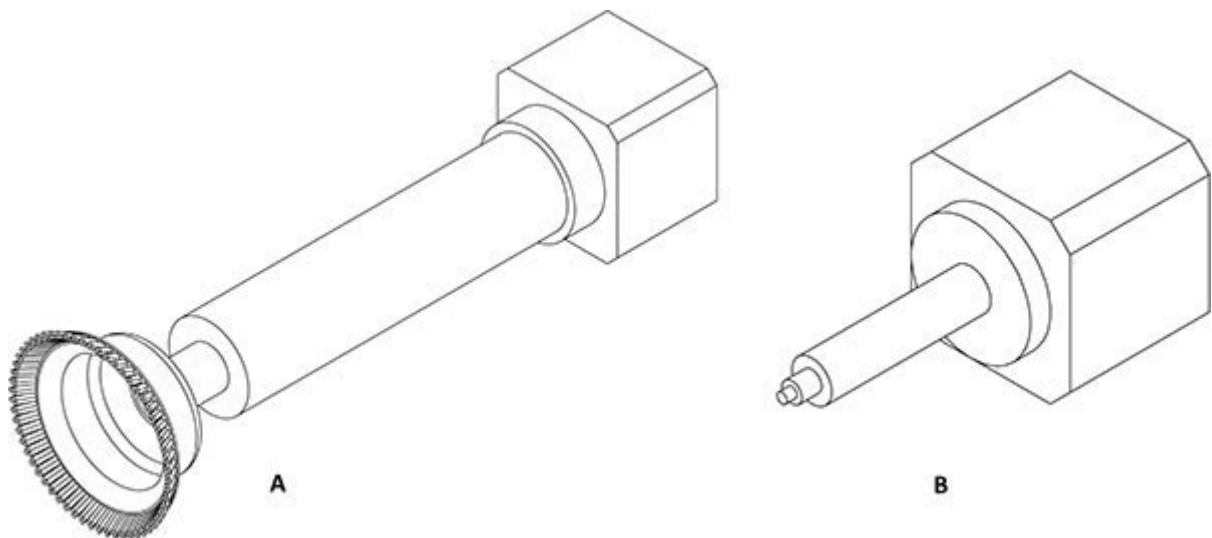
Tools for deburring (A) Deburring brush (B) Deburring tool
